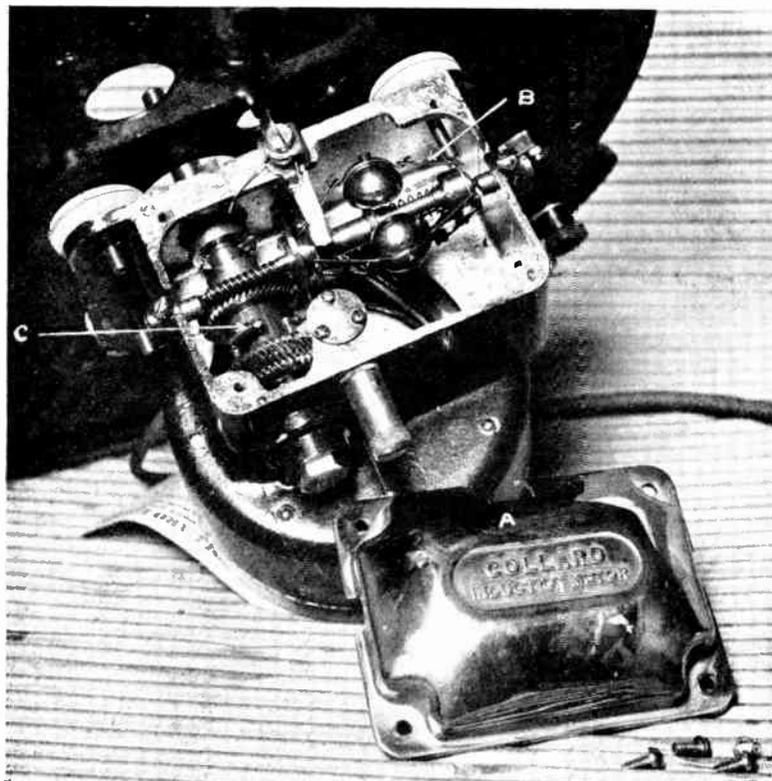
COLLARD INDUCTION MOTOR WITH COVER PLATE REMOVED.
